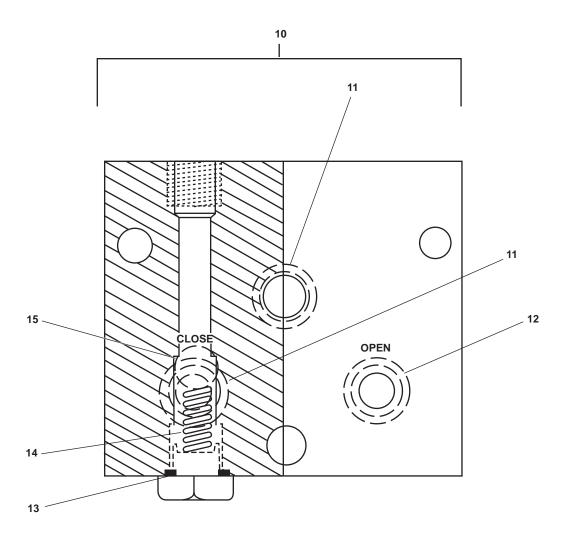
Hydraulic Watertight Doors (Sheet 3 of 9)
